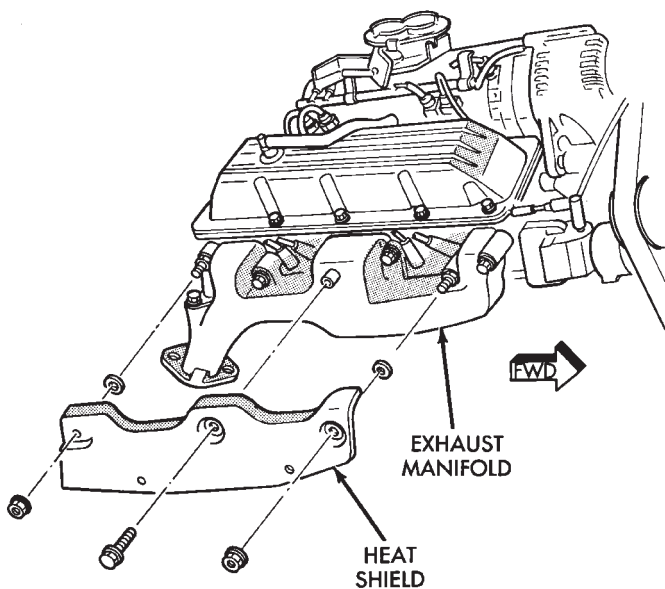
Exhaust Manifold Heat Shields (Left Shield Shown)
